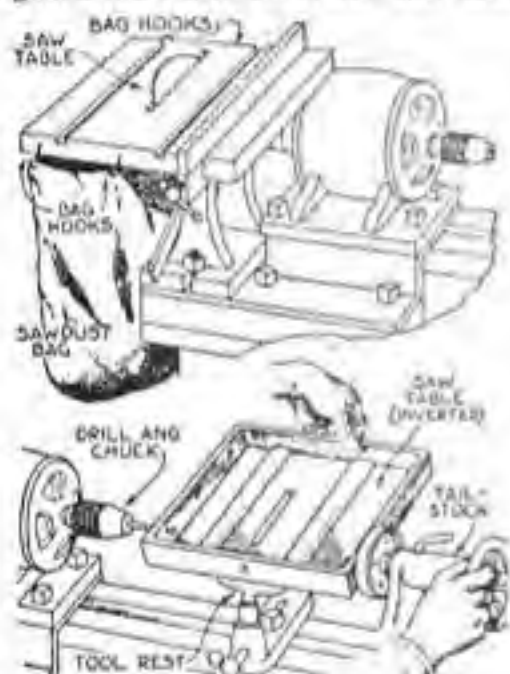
The sawdust bag in place (upper view); and how the holes for the hooks are drilled.
